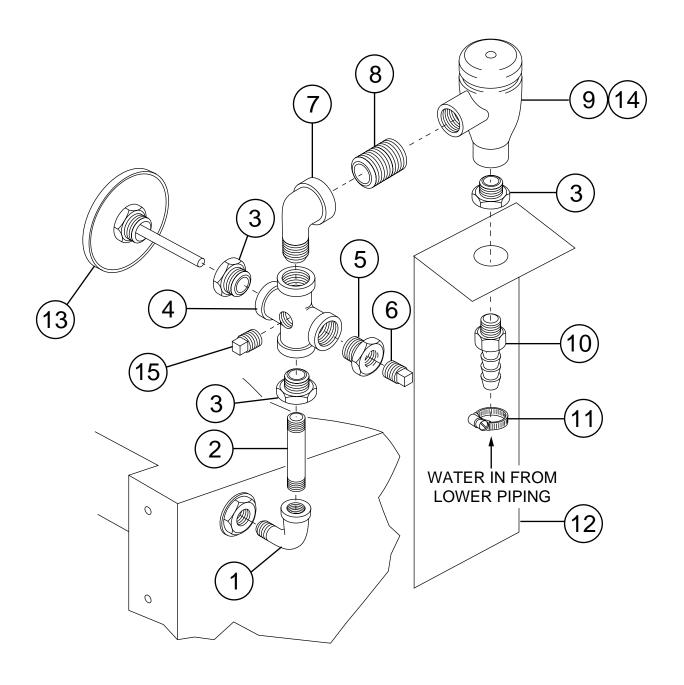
MH-6L Only Upper Fill Piping Assembly
